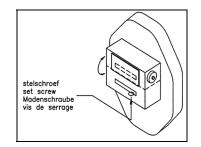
Changing position of the cover plate and position of set screw for rotating index
